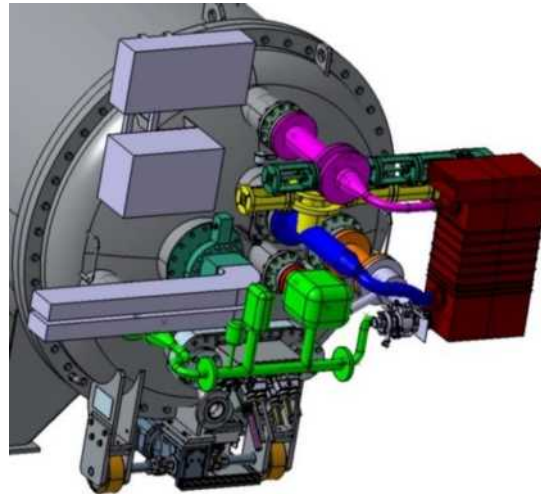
First draft of an optimized packaging of the components in a hybrid power plant
